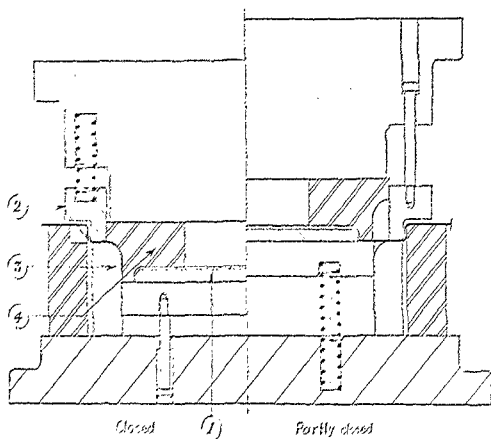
Die for drawing flange around center opening. (General Electric Co.)
